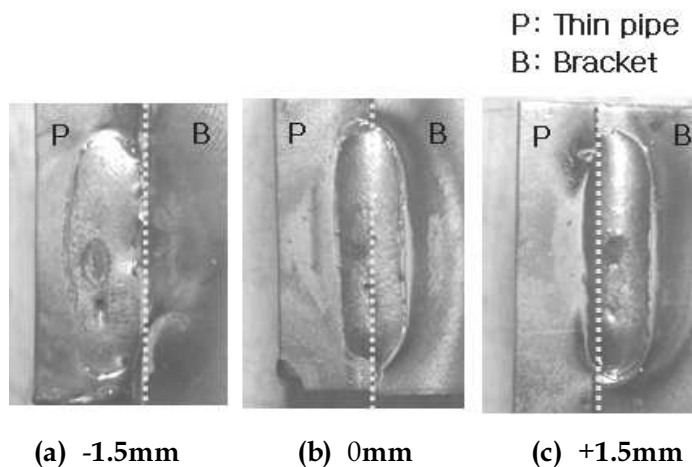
Surface bead appearance for welding line (heat input: 0.15kJ/mm)
